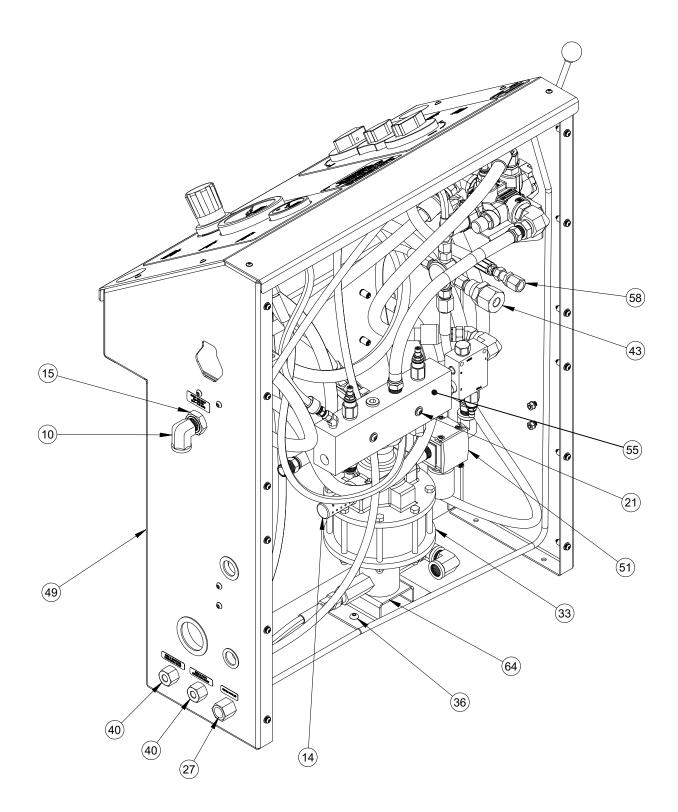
CONTROL CONSOLE USV ASSEMBLY BACK (P/N 89020)
